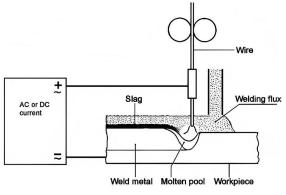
Submerged-arc welding (SAW) process [19].
